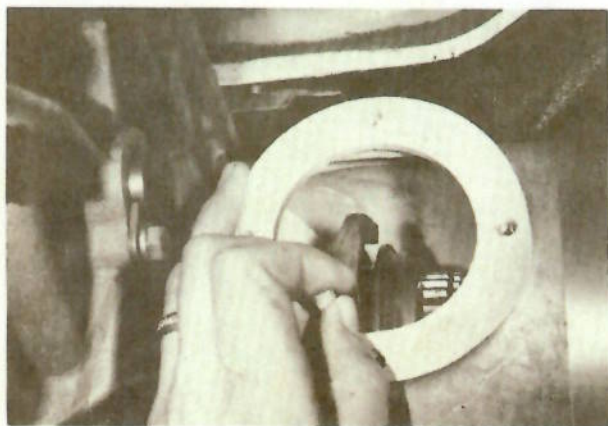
INSTALLING SHIFT FORK ON SLEEVE OF SYNCHRONIZER ASSEMBLY.
